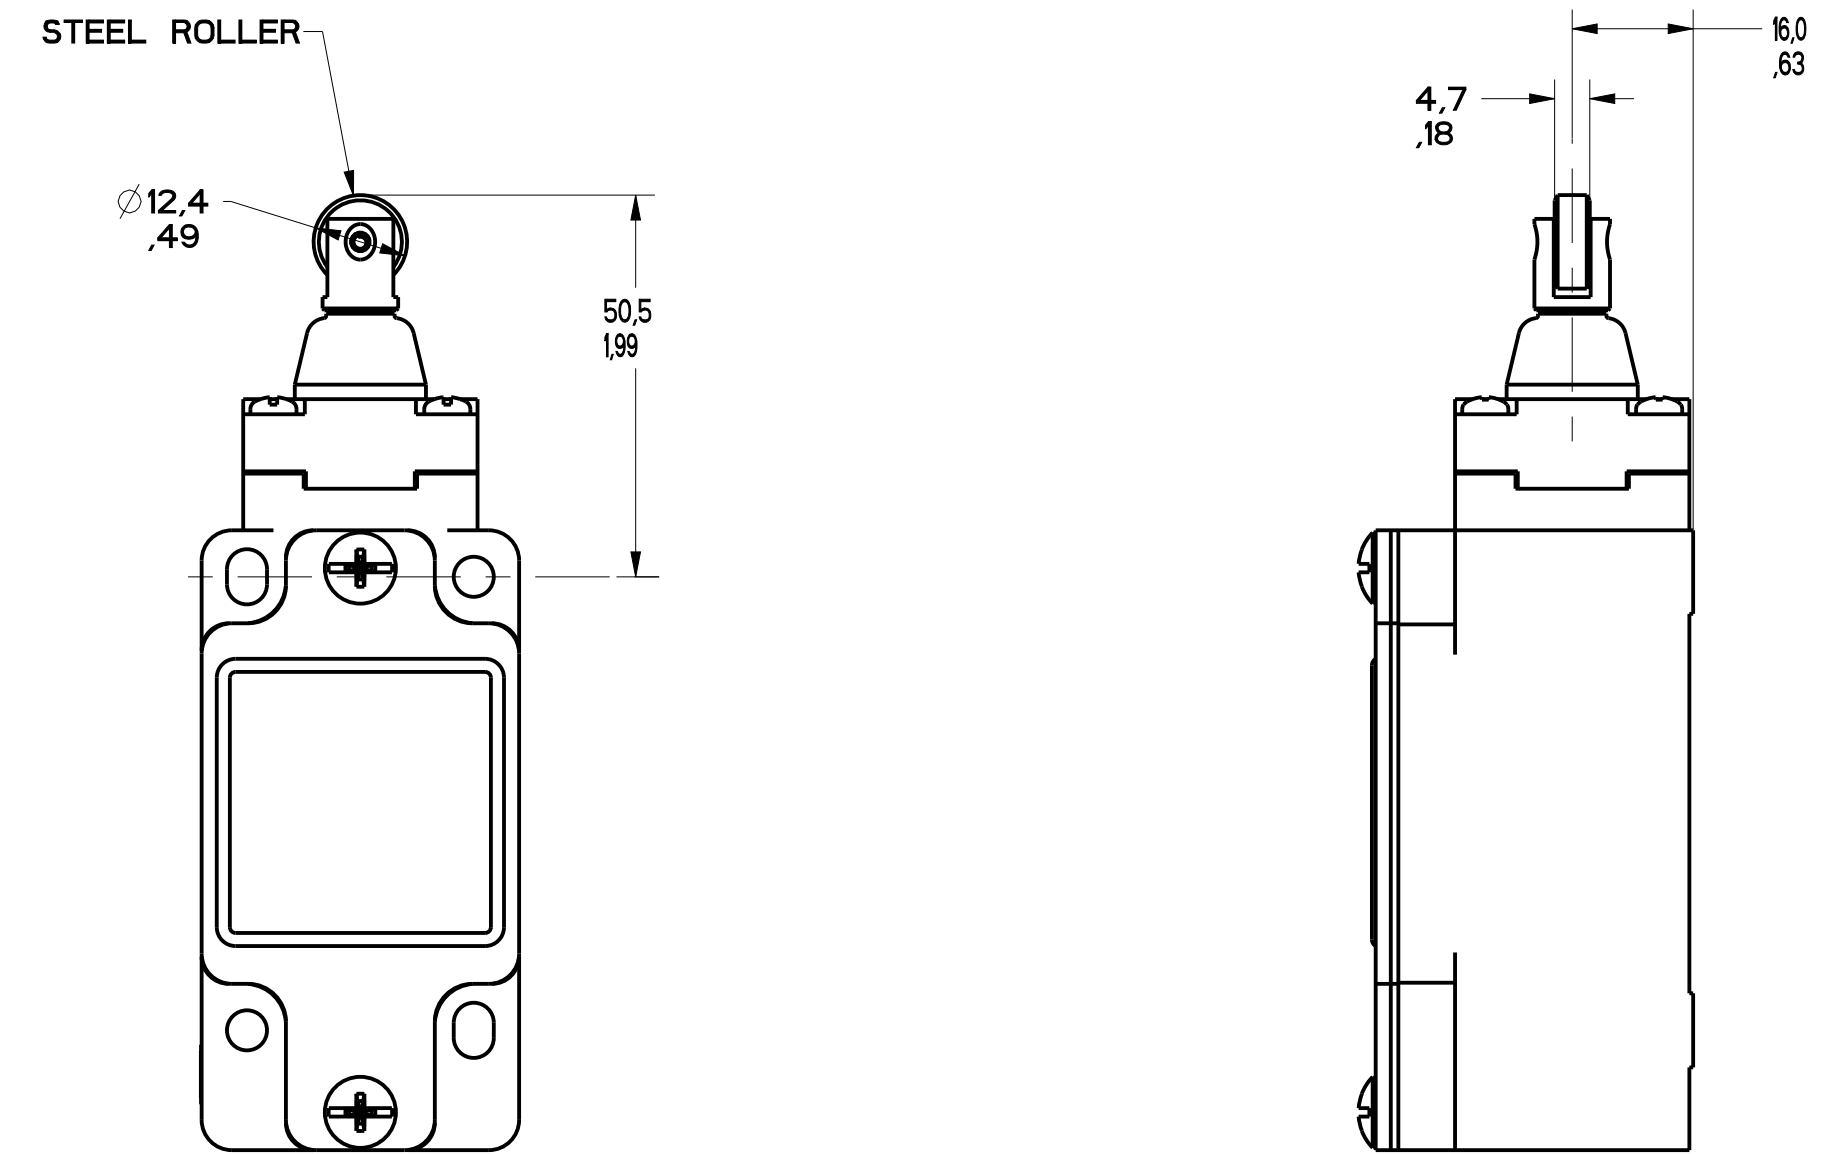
TOP ROLLER PLUNGER HEAD
